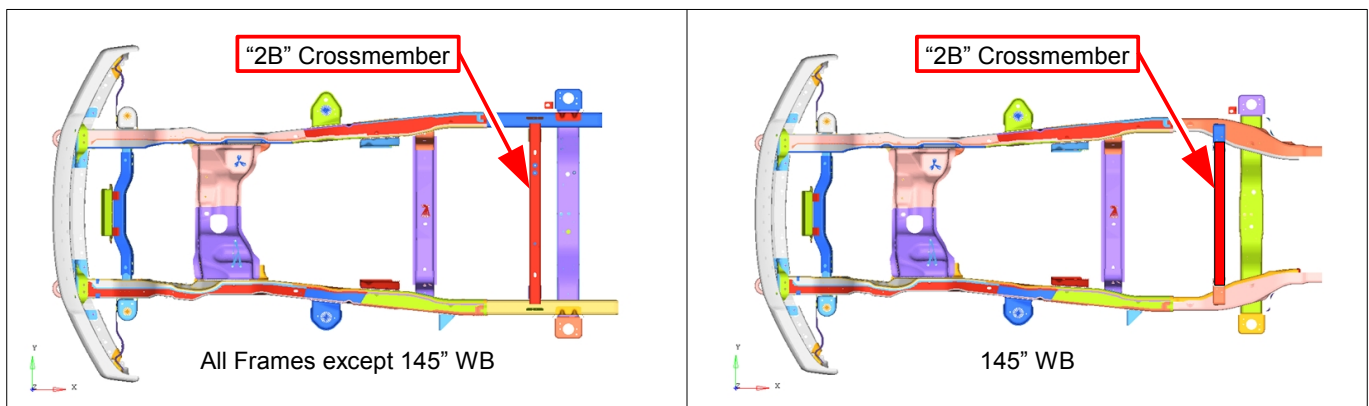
FIGURE B – SUPER DUTY "2B" BOLTED FRAME CROSSMEMBER LOCATED UNDER CAB – NOT TO BE REMOVED, RELOCATED, MODIFIED NOR ALTERED
